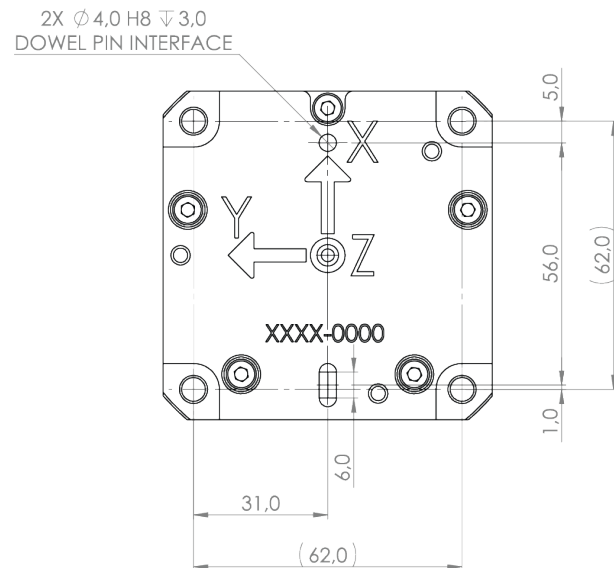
MRU Subsea / MRU Subsea H technical drawings: bottom view.
